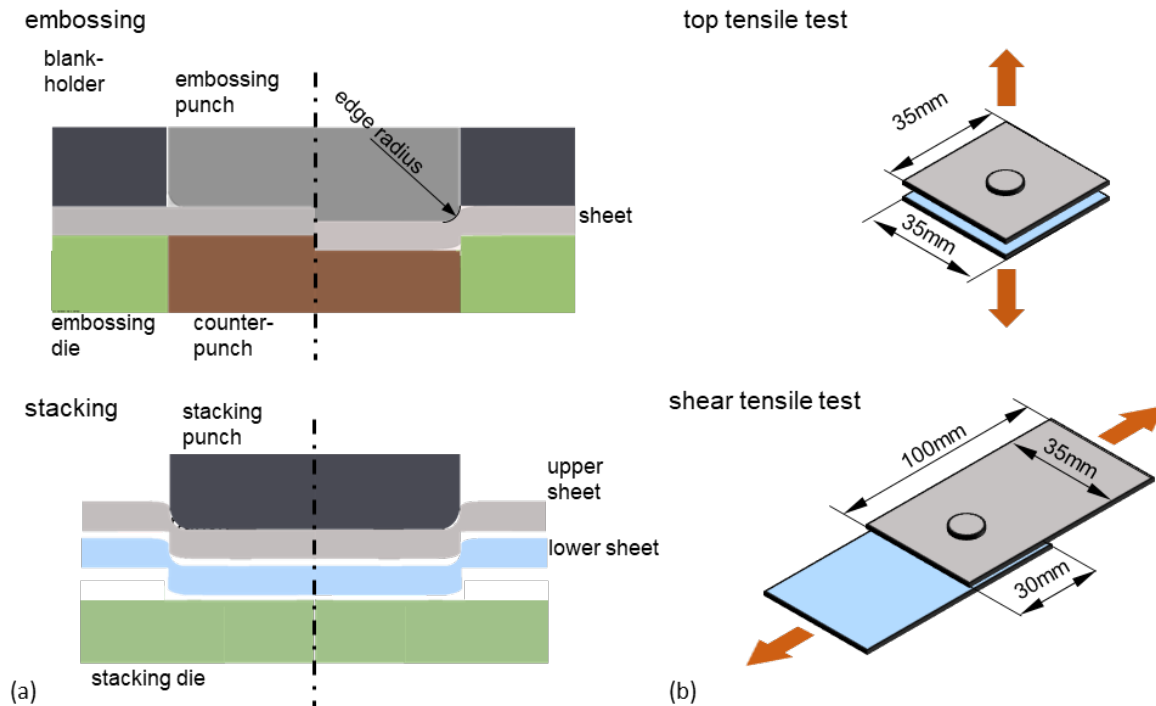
Experimental setup for embossing, stacking and tensile testing.
